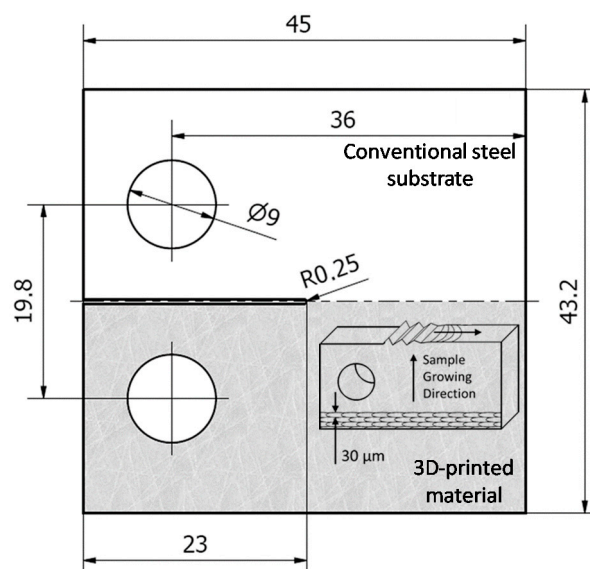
Specimen geometry, dimensions and schematic view of the hybrid parts (dimensions in mm).
